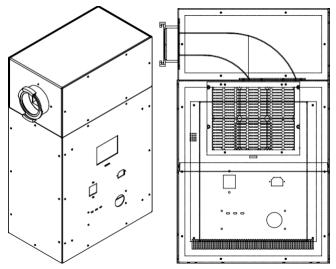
The engineering drawing of the ITM-OY7 air dryer
